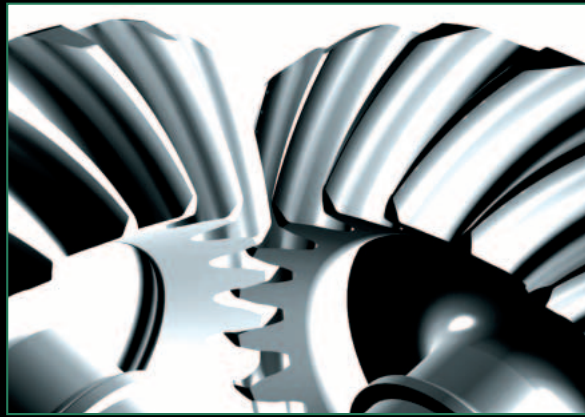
DDS model of involute-point tooth on spiral bevel gears.
